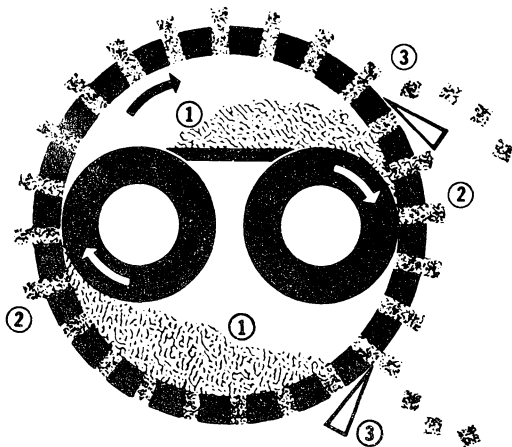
A popular design for pellet mills employing outward extrusion through large die roll. (Courtesy California Pellet Mill Co.)
